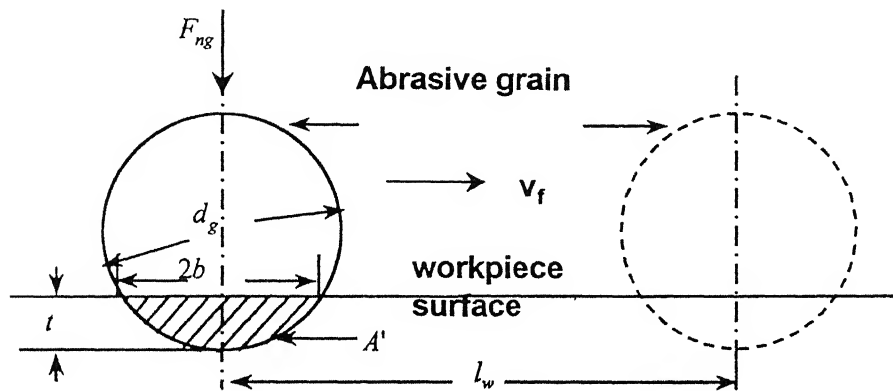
Schematic diagram of a spherical abrasive grain removing material from the workpiece surface.
